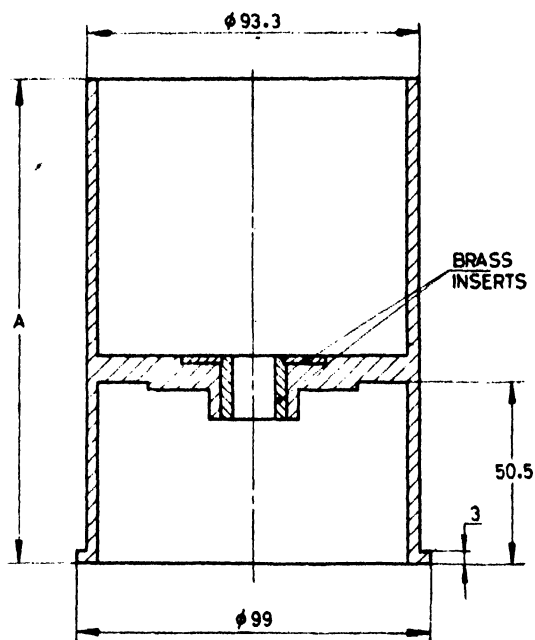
GENERAL ARRANGEMENT AND DIMENSIONS FOR CLOCK MECHANISM
